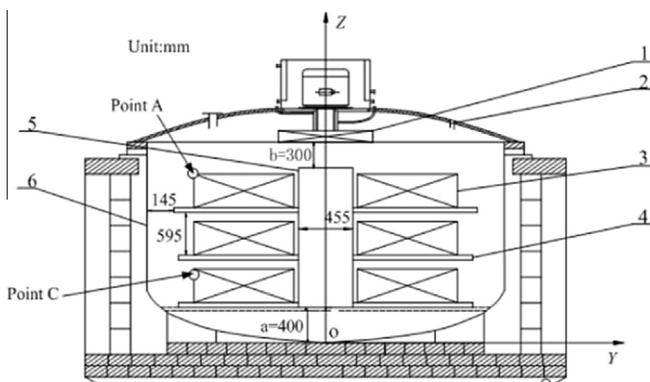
Schematic of the pit-type annealing furnace. (1. Blower. 2. Furnace cover. 3. Copper tube coils. 4. Load frame. 5. Gas-guiding cylinder. 6. Retort.).
